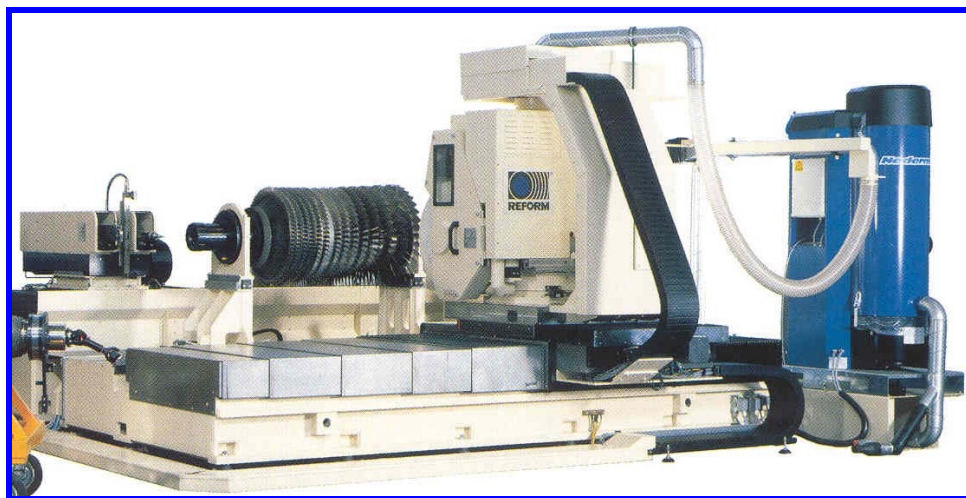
Image of a REFORM – Aero high-speed tip grinder.
